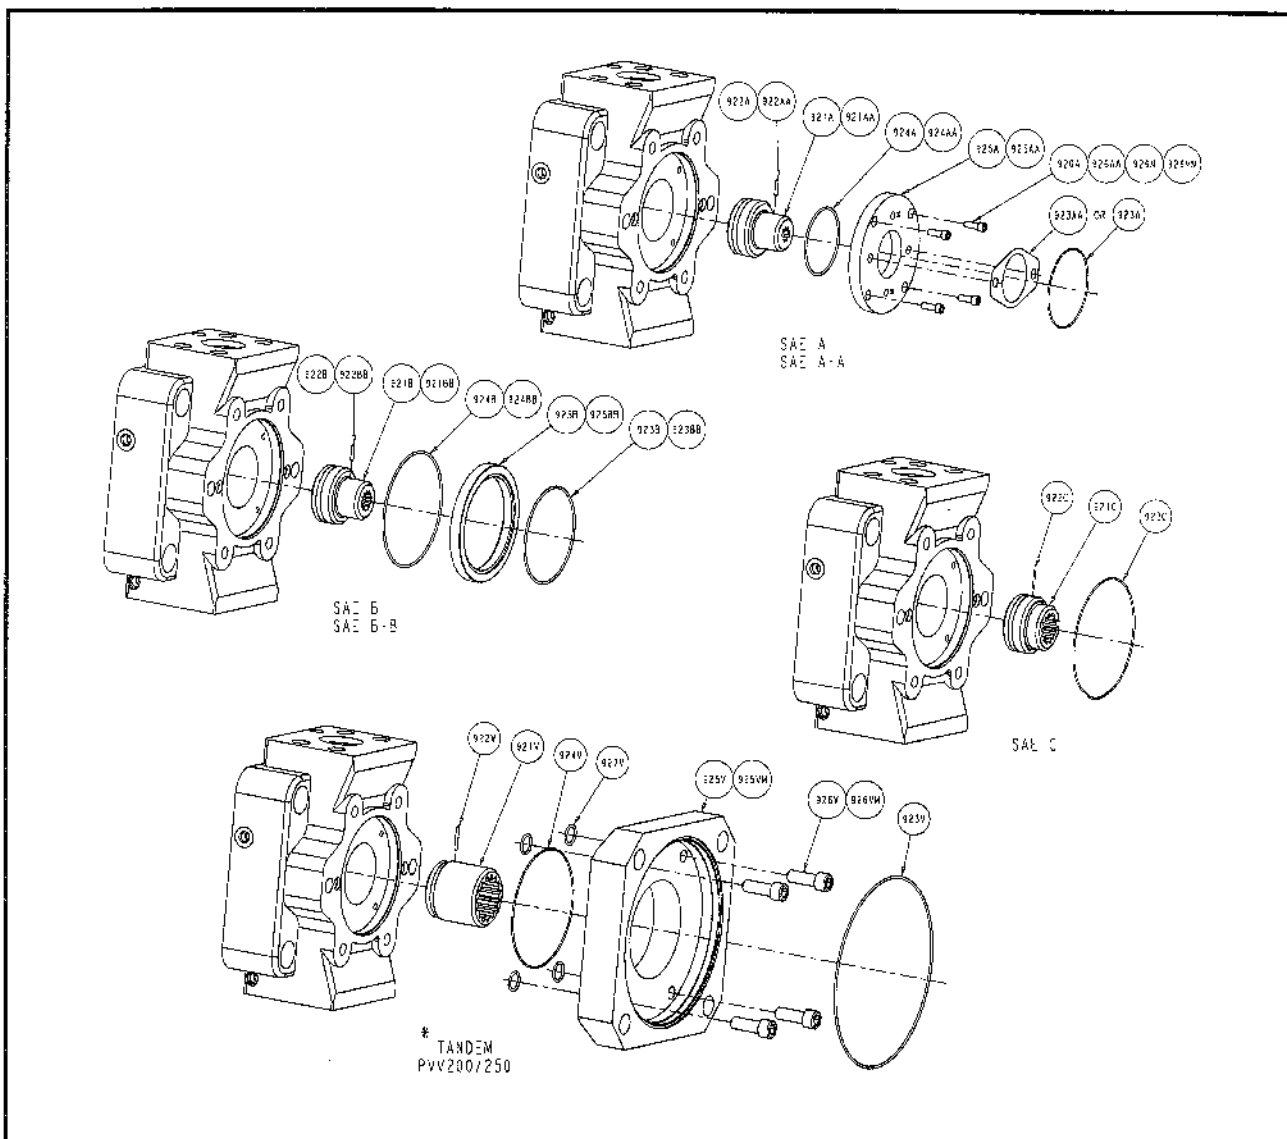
Exploded Parts Drawing (517925) sheet 6.
